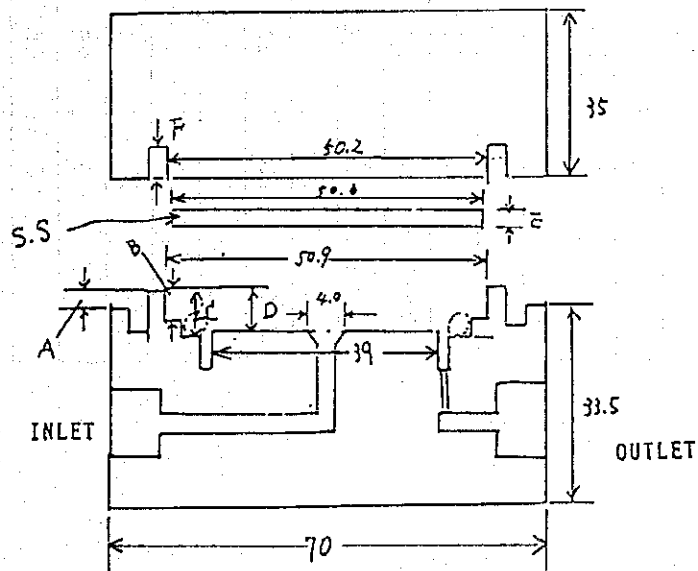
Detailed Drawing of the SWCC Flat Sheet Membrane Cell
